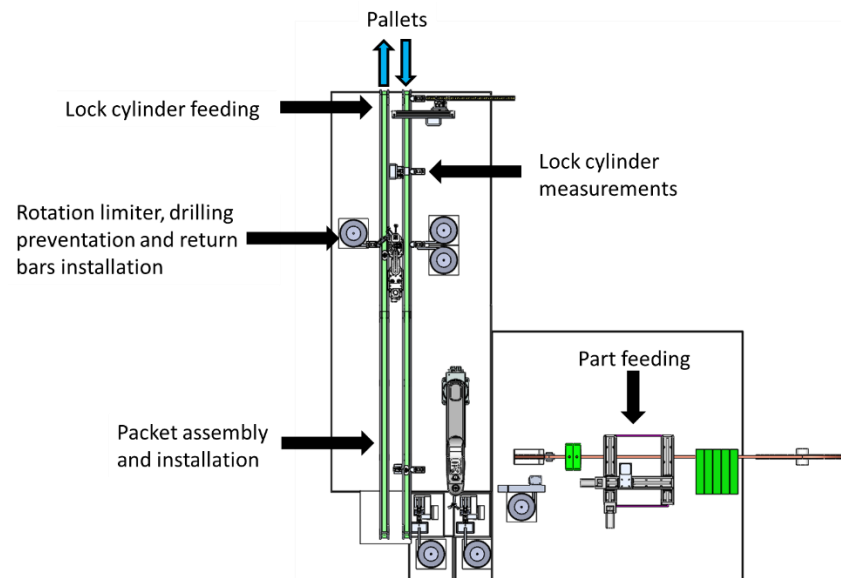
Position of different work phase in the proposed assembly machine with a laser cutter.
